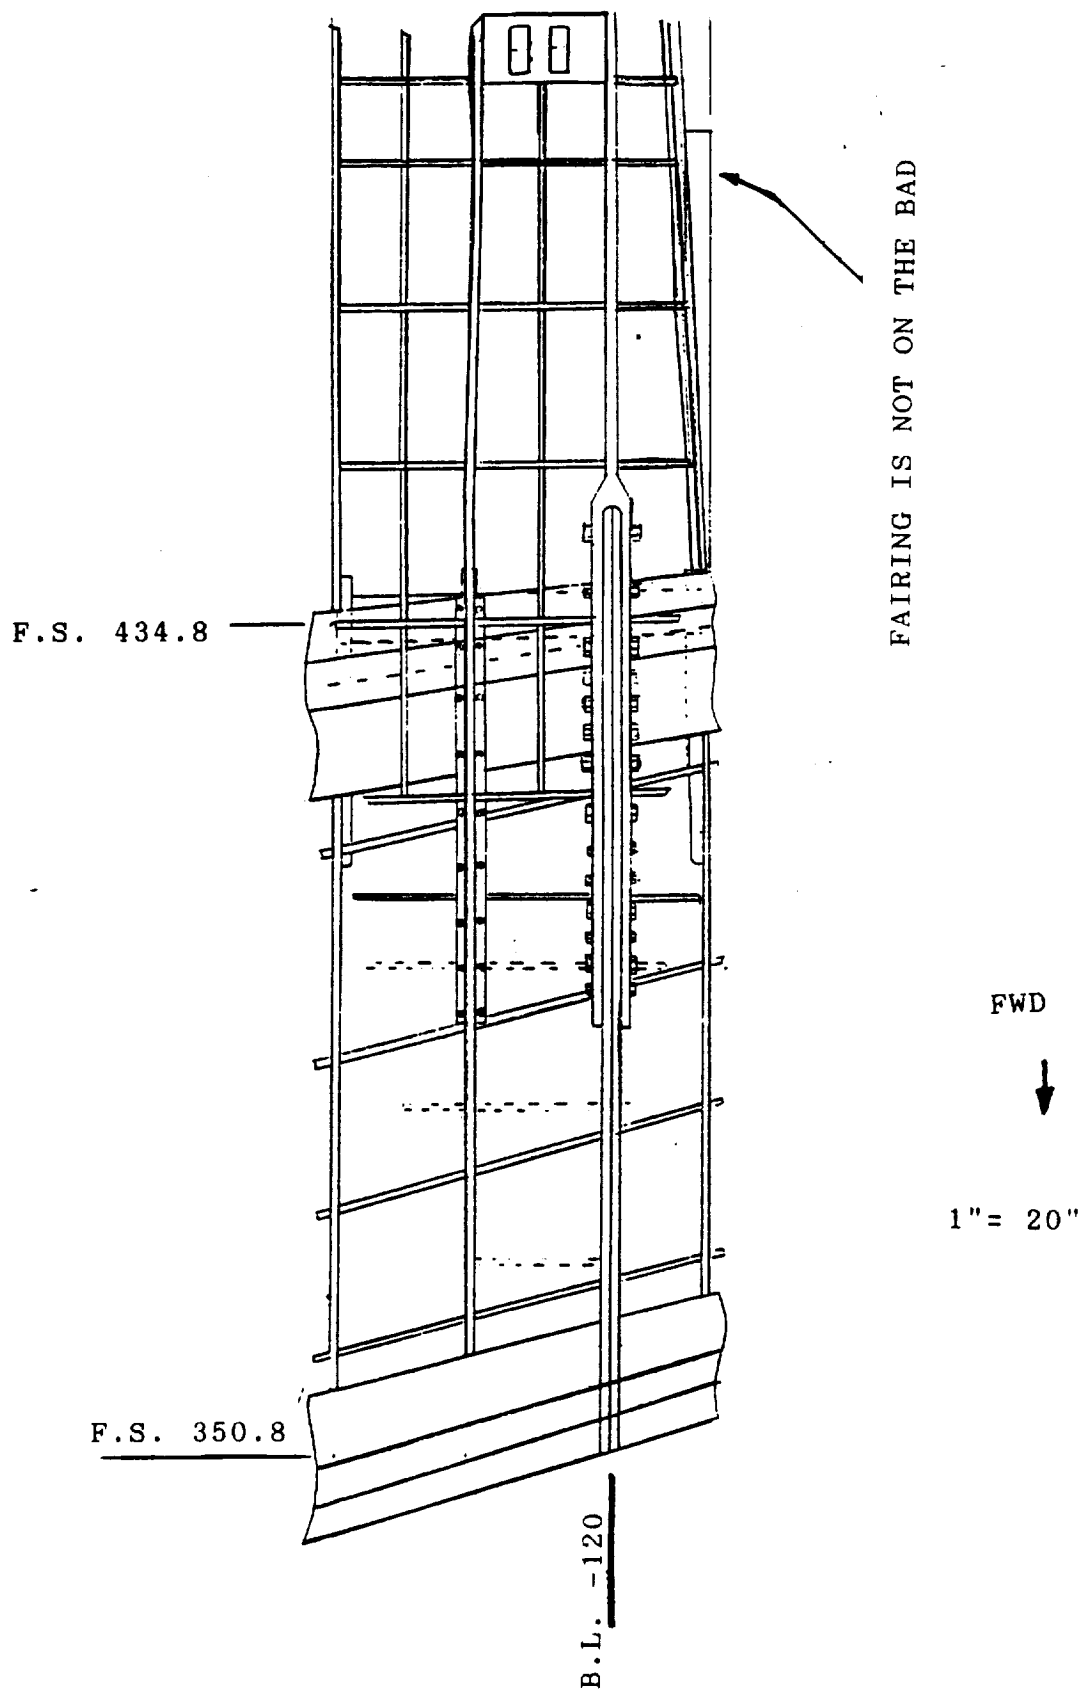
Boom and main gear attachment for the Good airplane. (Top view)
